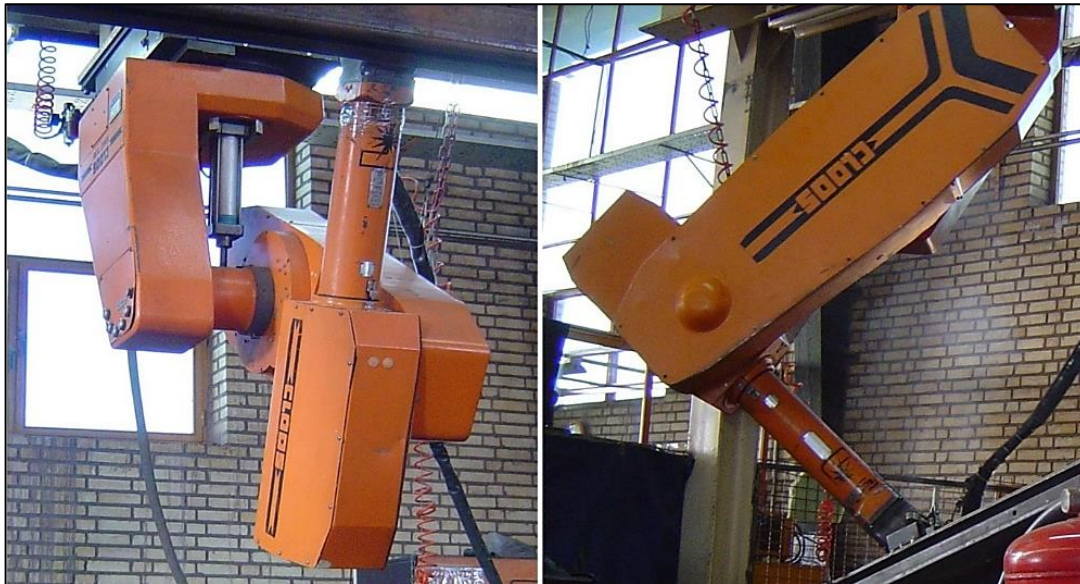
The GMAW welding robot and its apparatus used in experiments.
